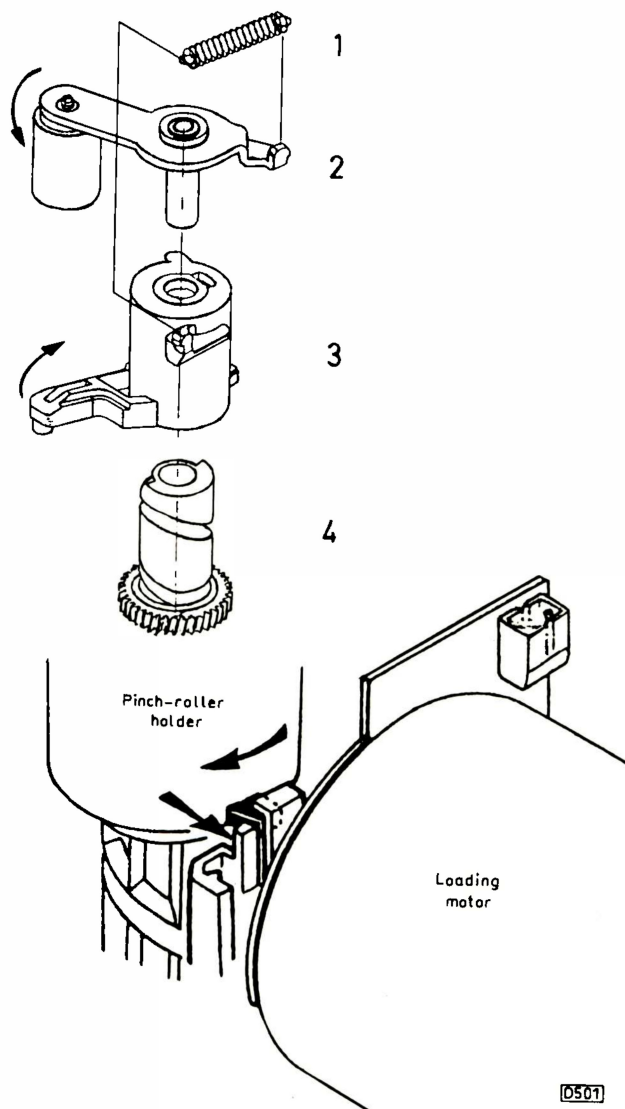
The pinch-roller assembly. 1 Tension spring; 2 pinch-roller bracket; 3 pinch-roller holder; 4 helter-skelter gear.
